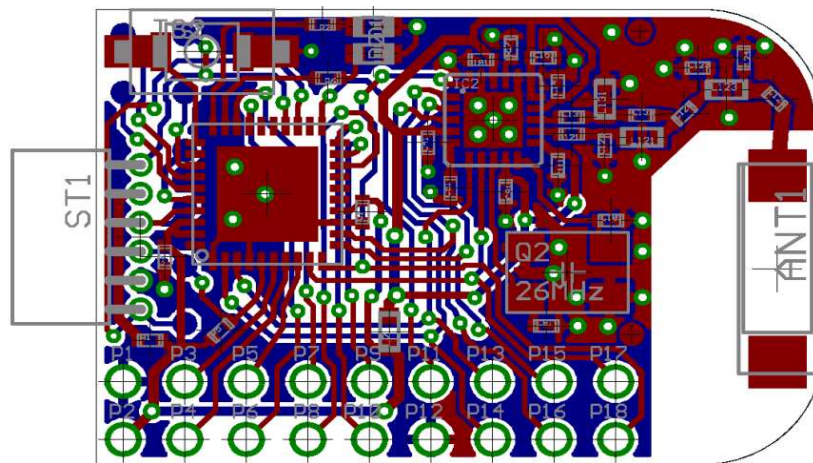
eZ430-RF2500T, Target Board, PCB Layout
